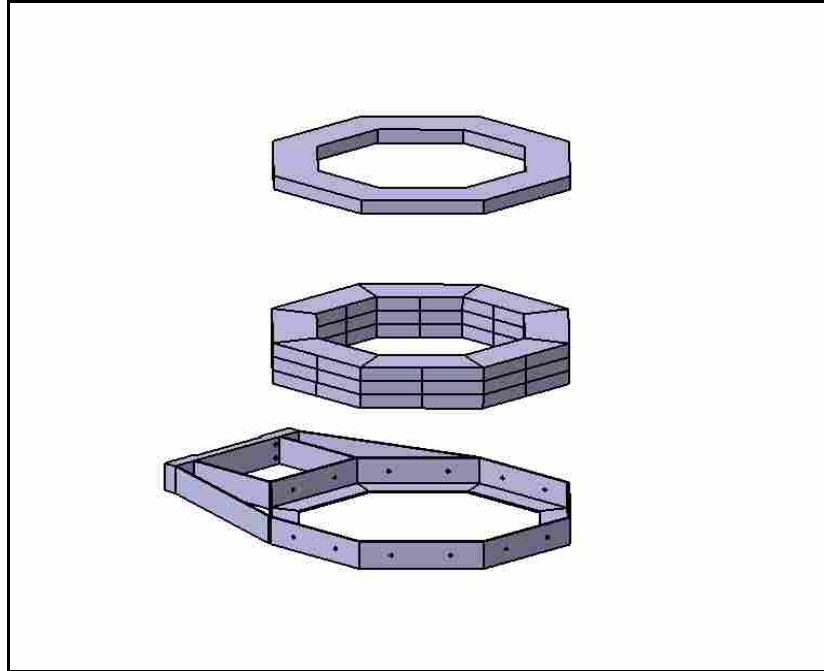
Exploded view of the octagonal steel support frame and three layers of assembled insulation blocks, and a layer of insulation blanket cut to the same shape as the assembled blocks.
